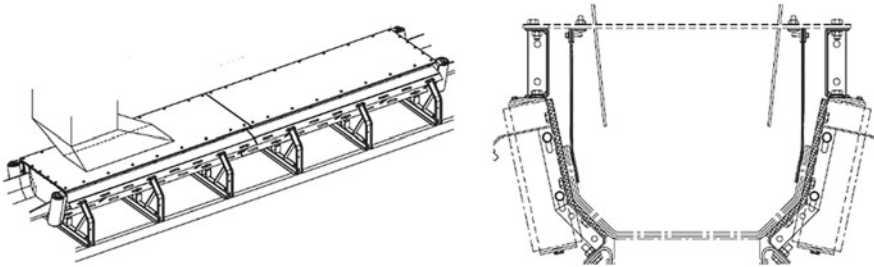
Suction shelter for Sandvik conveyor belt loading
